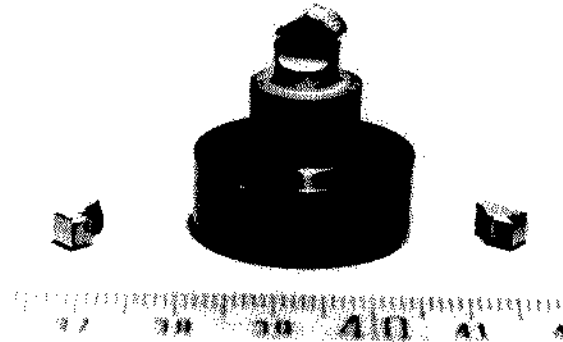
View of the cracked key evidencing the rupture surfaces.
